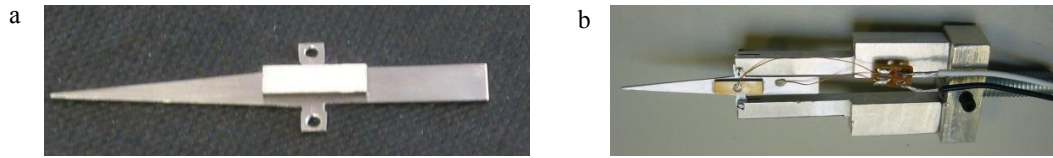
Fabrication of the surgical tool (a)  $d_{31}$  plate is bonded to the blade (b) wires are connected and a holder is assembled
